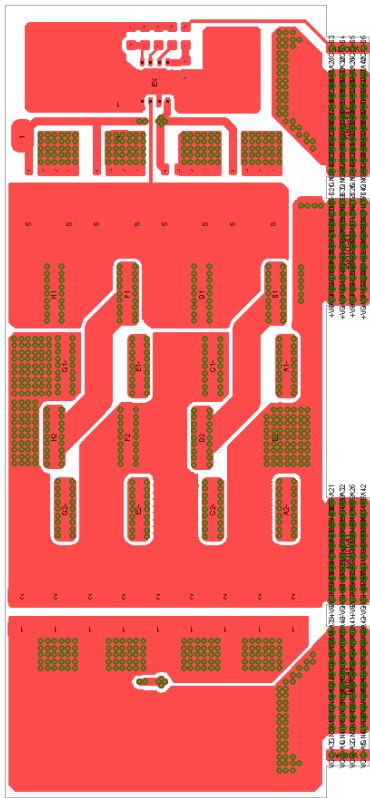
Top Layer PCB Layout and Assembly Plan of SR CARD
